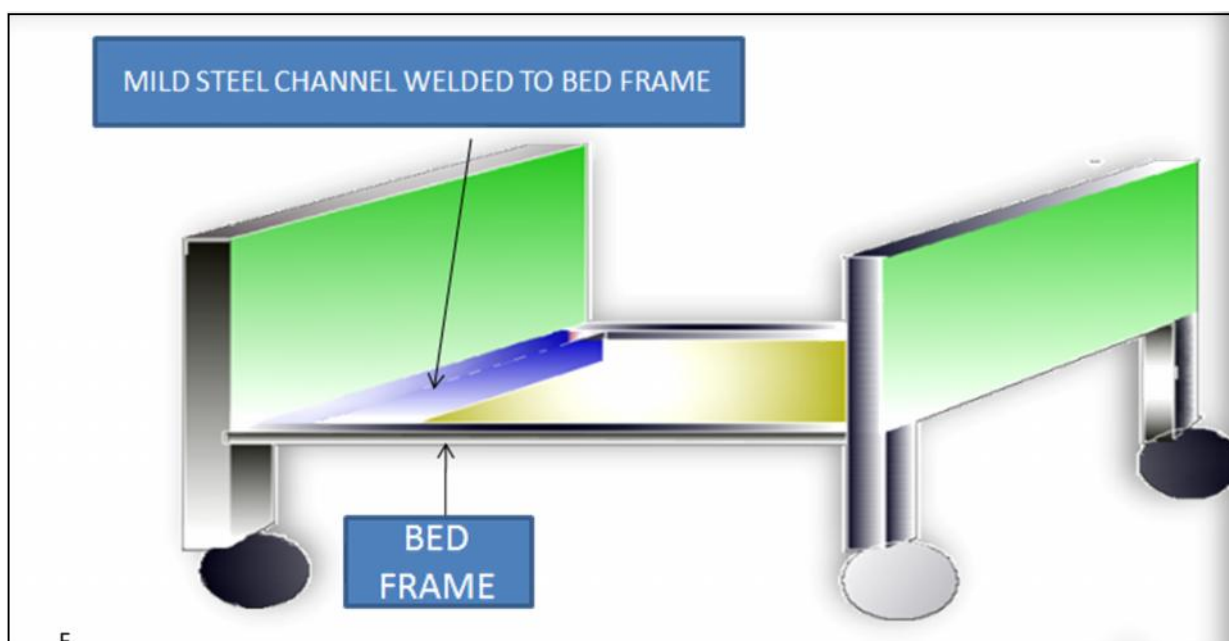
Mild steel channel welded to the frame of hospital bed
